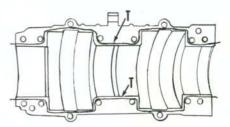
After applying sealant to crankcase lower half, lay a cotton thread at inside of bolt holes as shown at (T).
